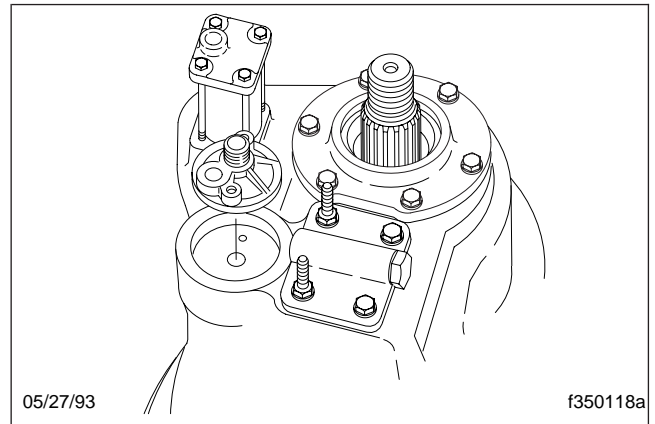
, Axle Oil Filter Adapter Removal and Installation
